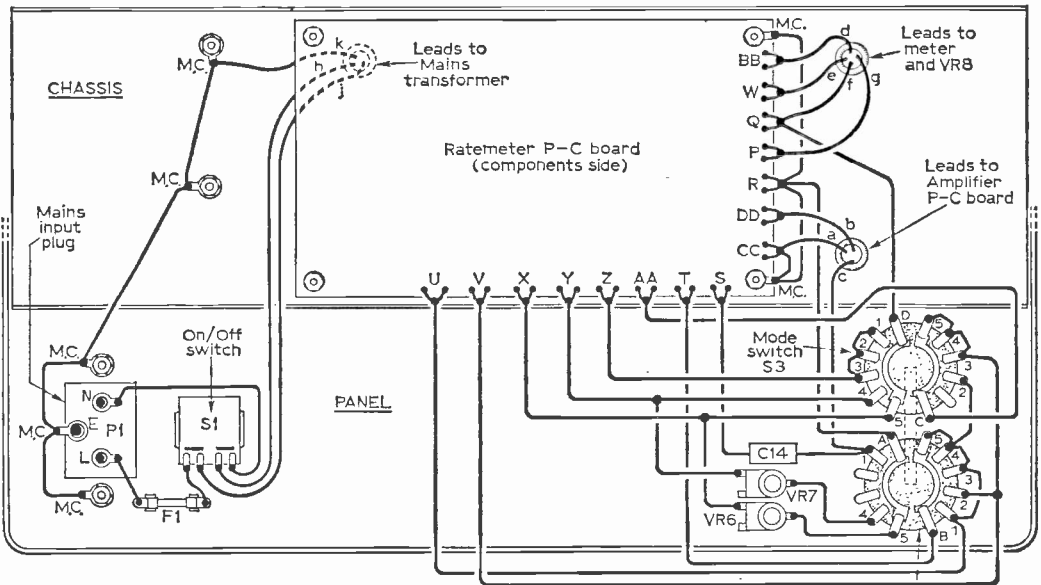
Wiring above chassis. The power supply and amplifier printed board is mounted on top of the chassis
